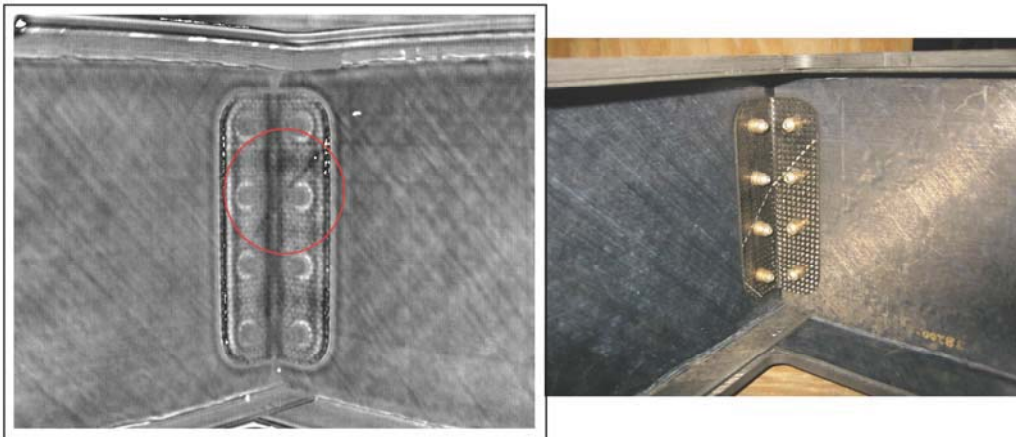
Thermal inspection results for cruciform 2, rivet 3.
